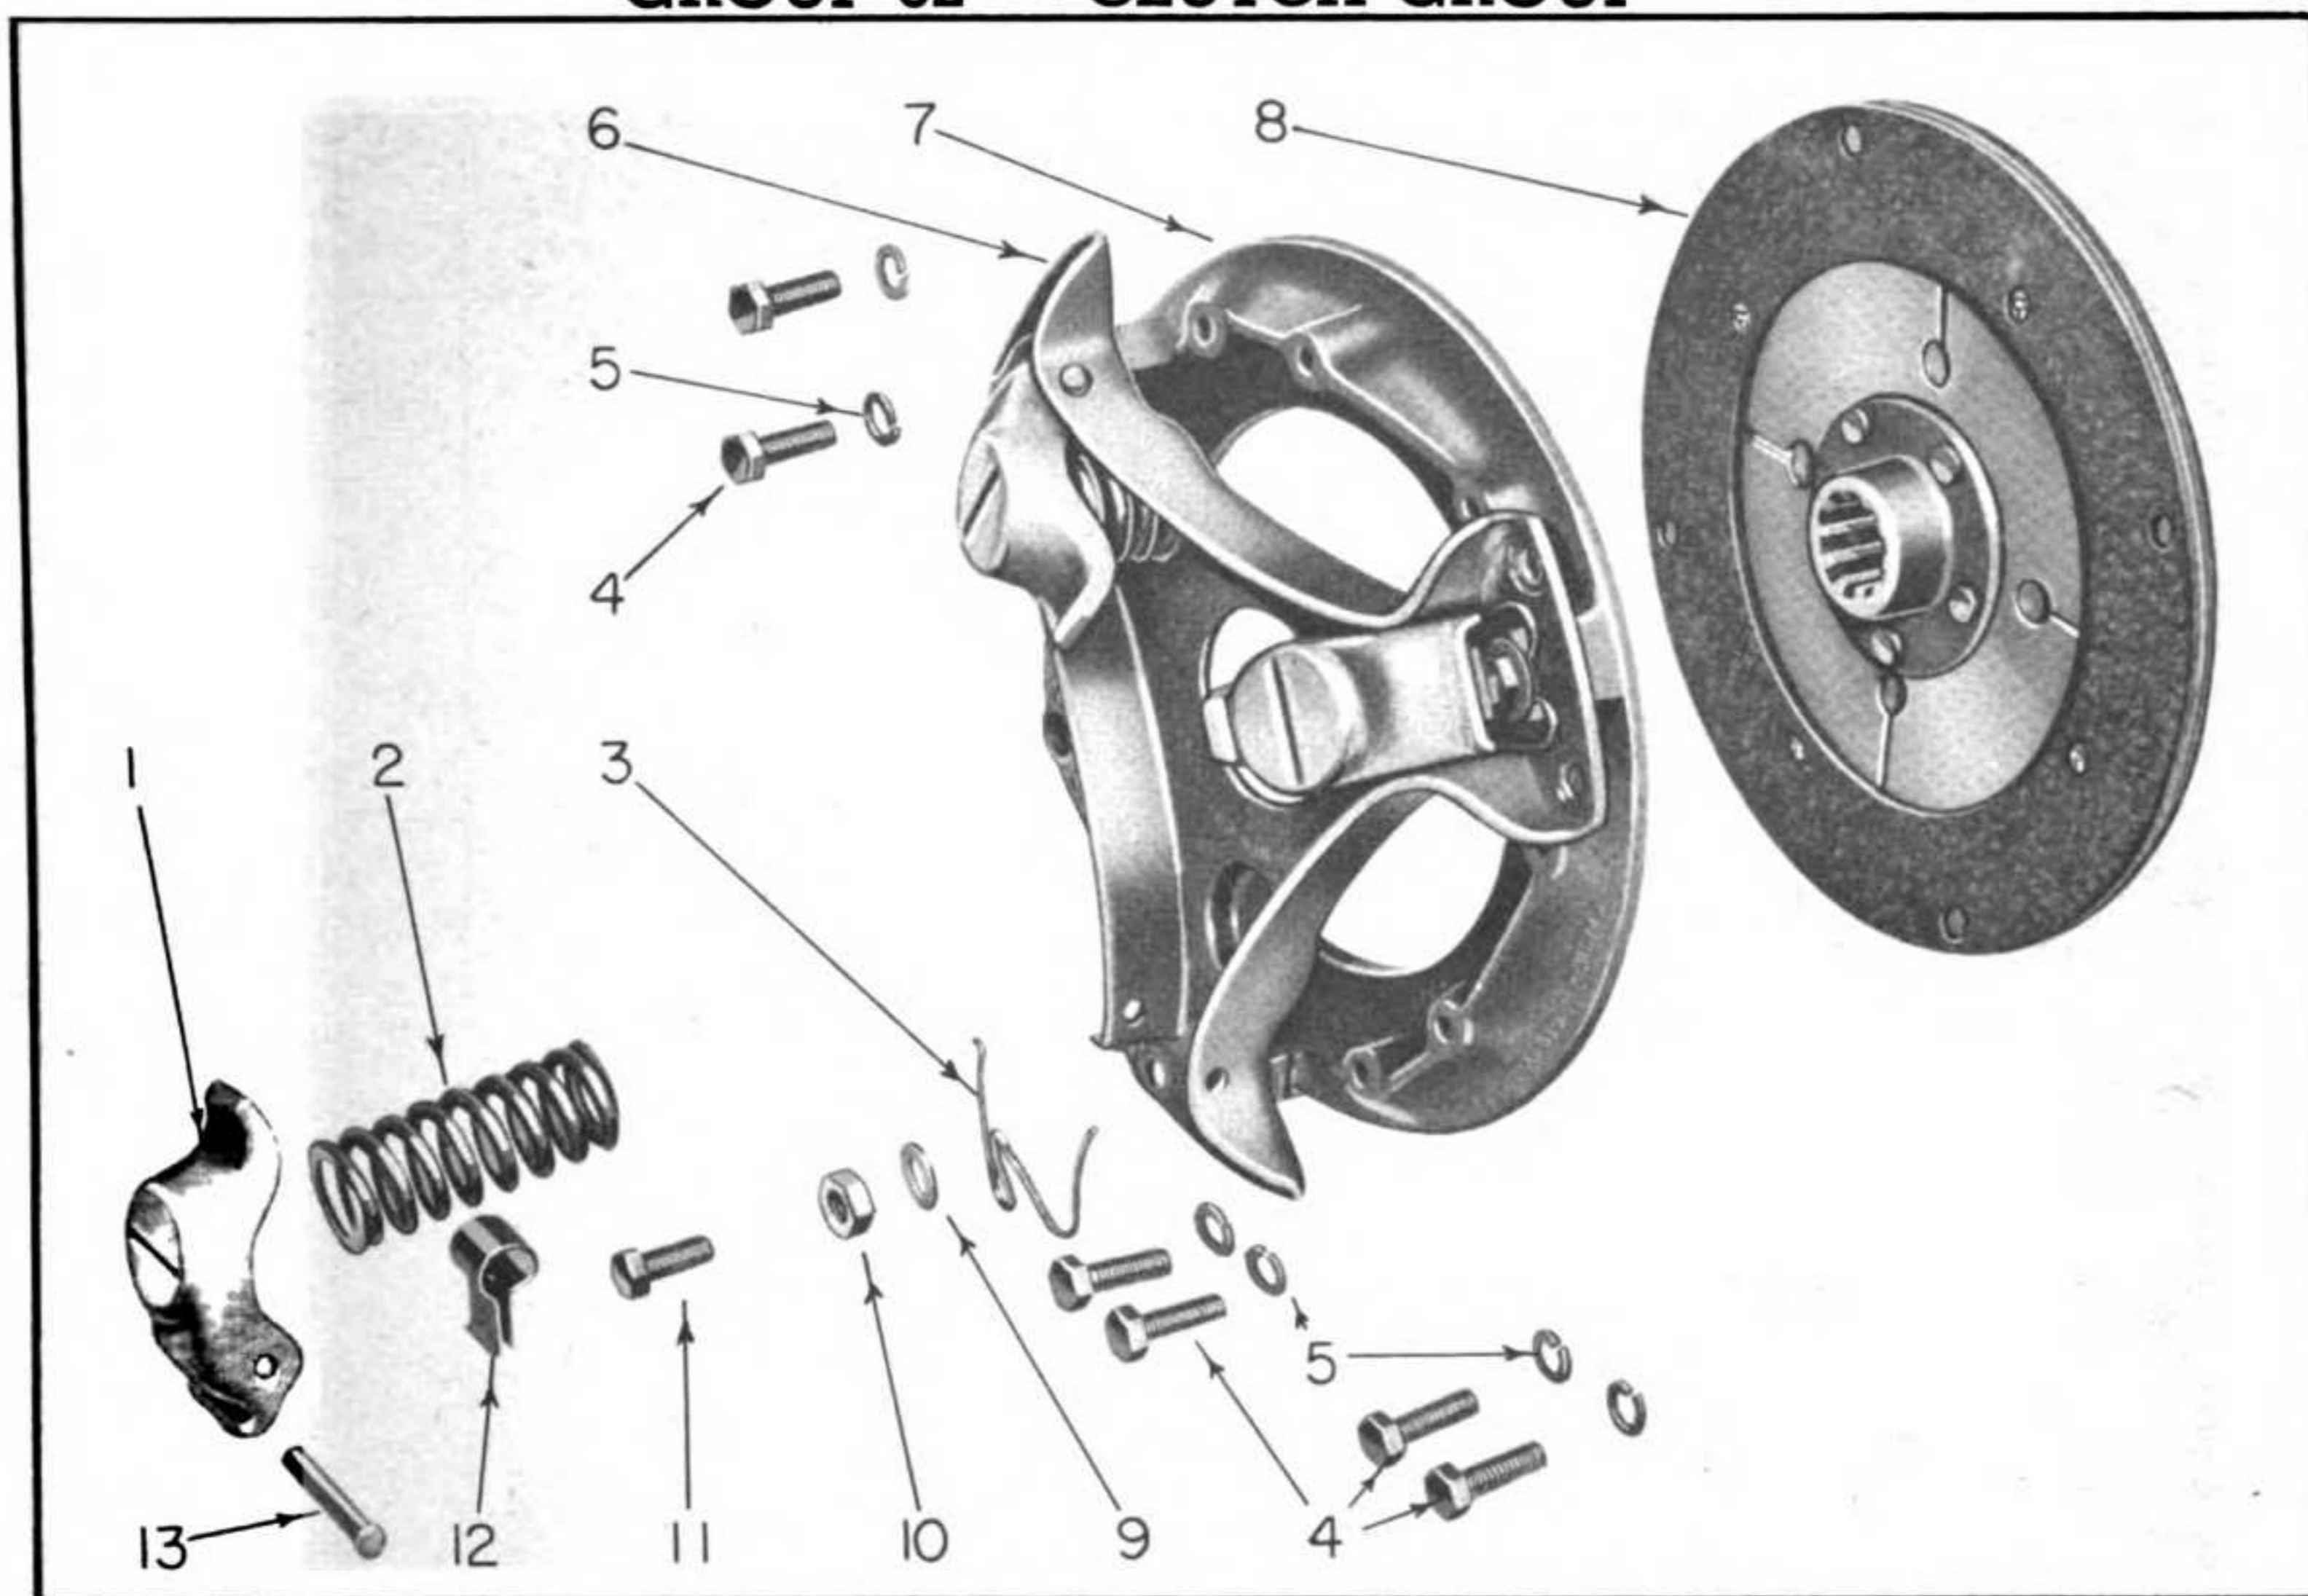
0202 CLUTCH PRESSURE PLATE AND LINING
